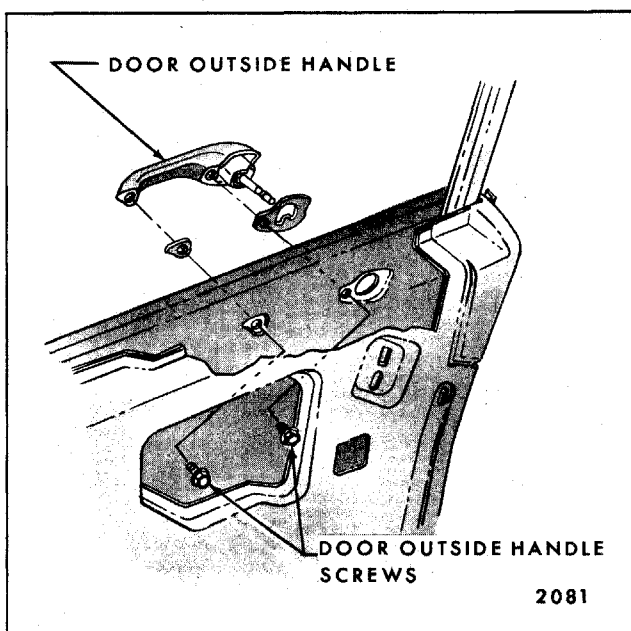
Outside Handle Removal (Push-Button Type)
